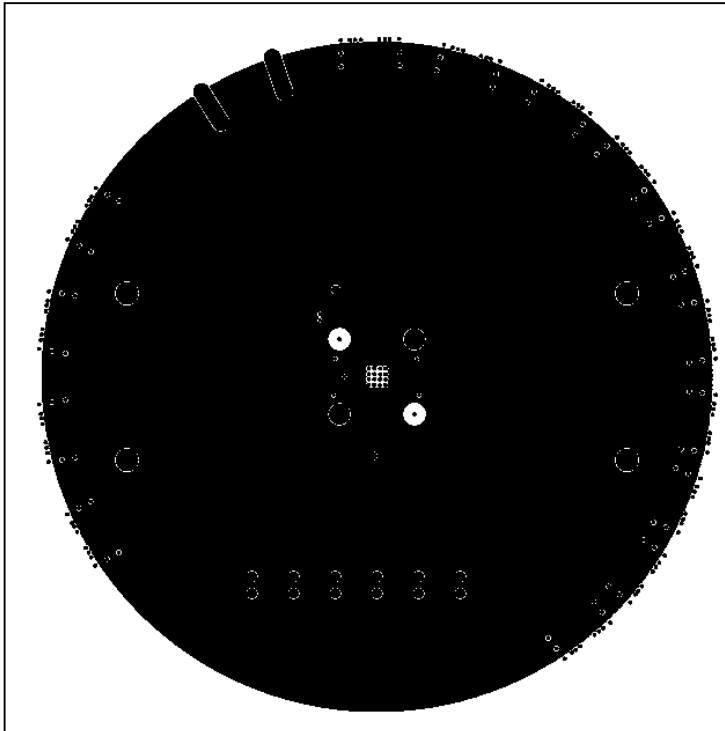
MAX3786 EV Kit PC Board Layout—Power Plane
